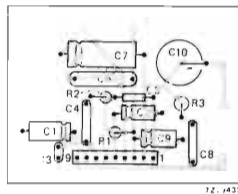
Component side of printed circuit board showing component layout used for the circuit of Fig. 4.
